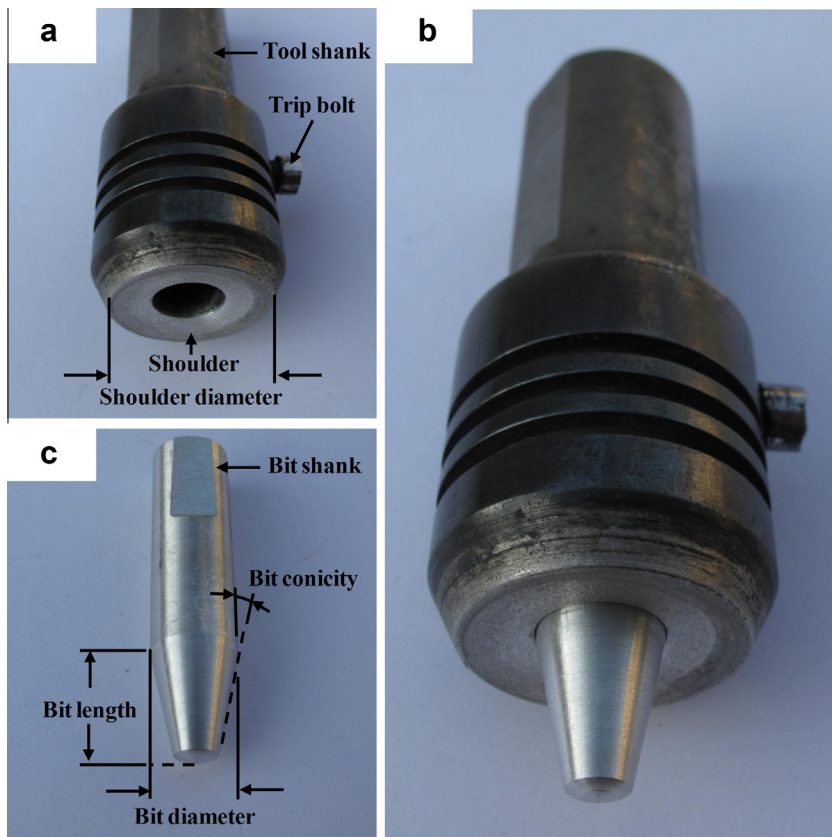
Features of FFSW tool: (a) steel shoulder, (b) AA7075 bit and (c) assembled semi-consumable FFSW tool.
